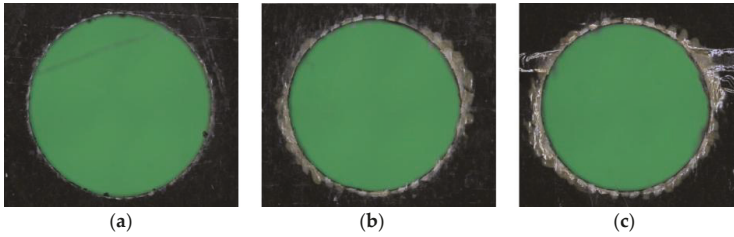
Pictures of (a) hole number 1, (b) hole number 30, and (c) hole number 60, made by tool T2.
